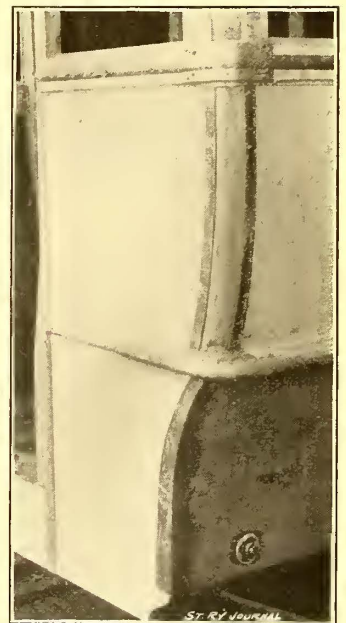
CORNER PLATES FOR DEFENDING JOINTS.
